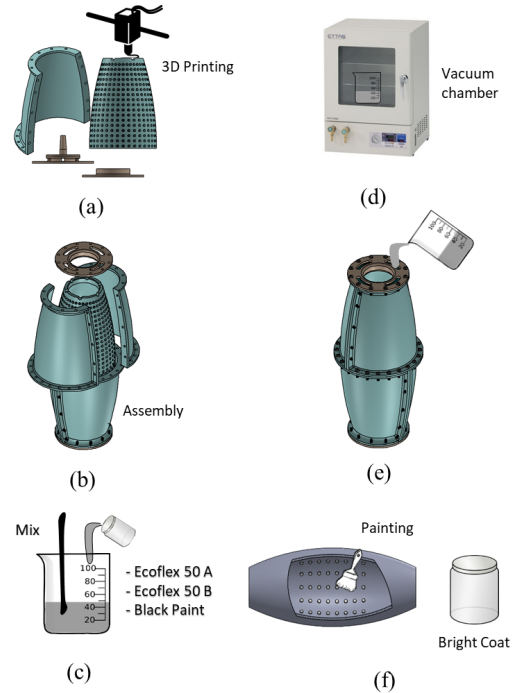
Fabrication process: (a) Molding printing, (b) Mold assembling, (c) Mixing the silicon rubber with black paint, (d) Getting rid of bubbles, (e) Casting, (f) Coating inner dots with reflective paint.
